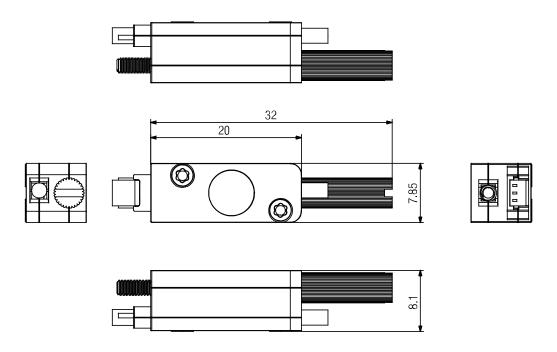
Sync cable CBL-MJ-SYNC-3M0 dimensional drawing
